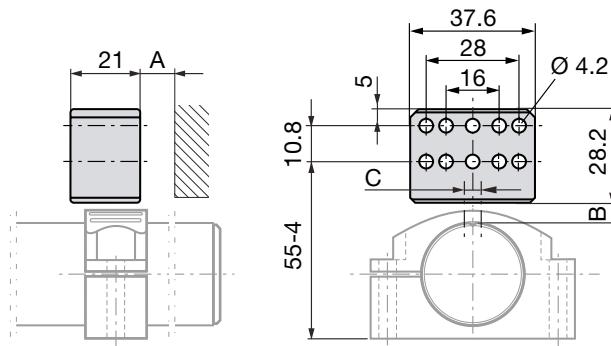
Dimensions and spacing with magnet BTL6-A-3800-2
